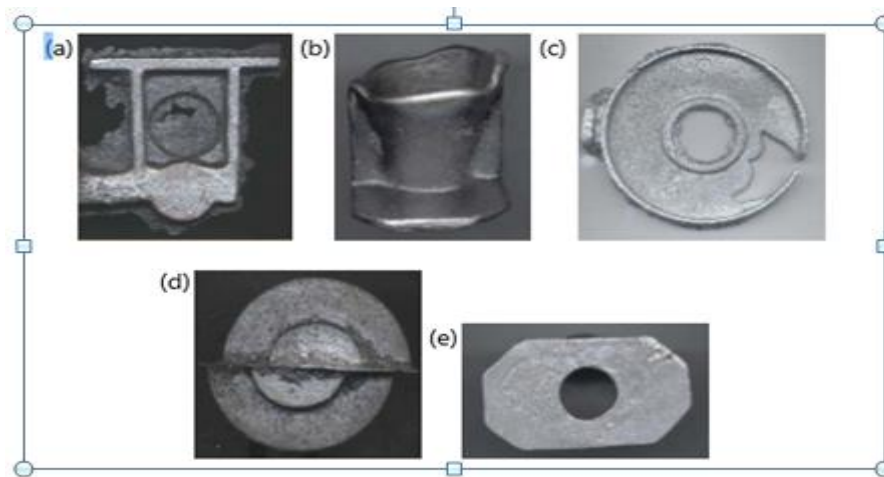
Examples of common defects in castings – (a) flash, (b) porosity, (c) short casting, (d) mould shift, (e) inclusions
